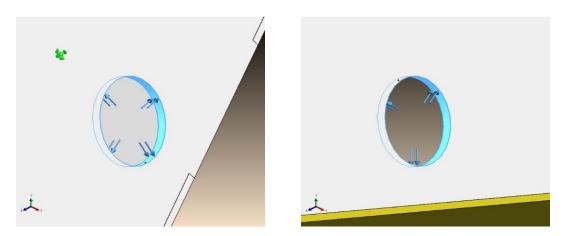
(Left) Outlet Assembly Port; (Right) Inlet Assembly Port
